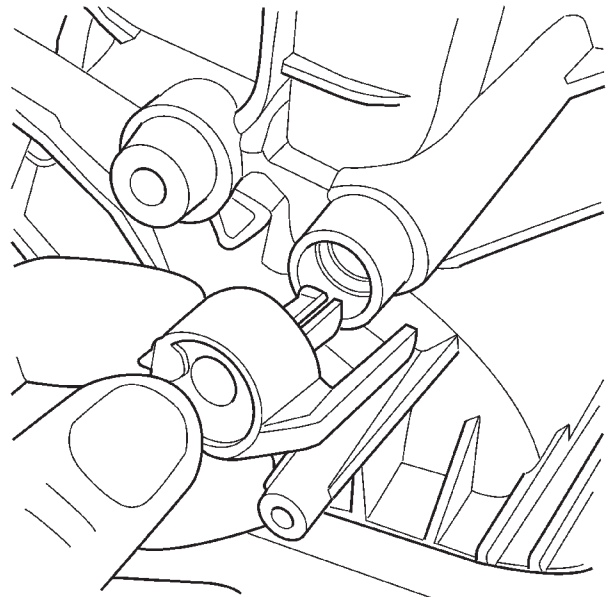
HEAT/DEFROST DOOR ASSEMBLY
